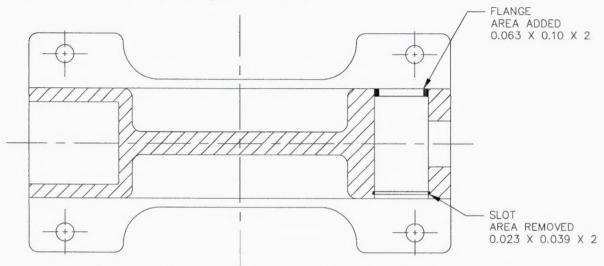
Landing Gear Fitting Section Through Barrel Nut Hole (49311-01 shown, all other similar)
